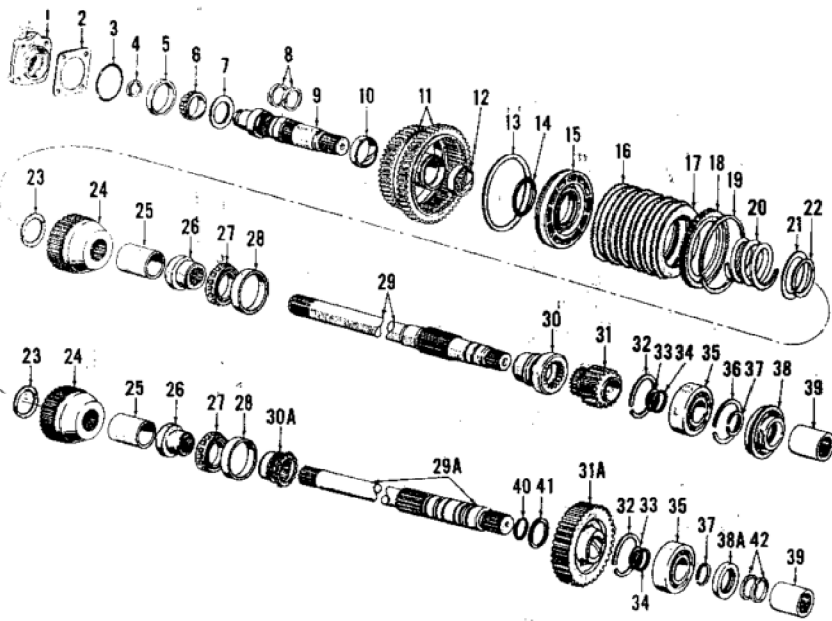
Exploded view of two-speed PTO clutch and shaft assemblies. Lower countershaft (29A) is for model 4000; other models use shaft (29). Refer to Fig. 305 for single speed PTO.
